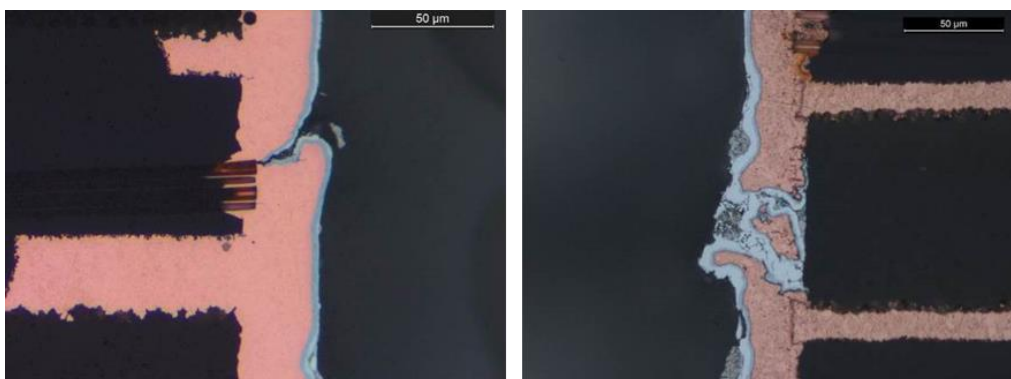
Examples of barrel cracks after IST testing showing a nominal crack size (left) and a large crack filled with SnPb (right)
